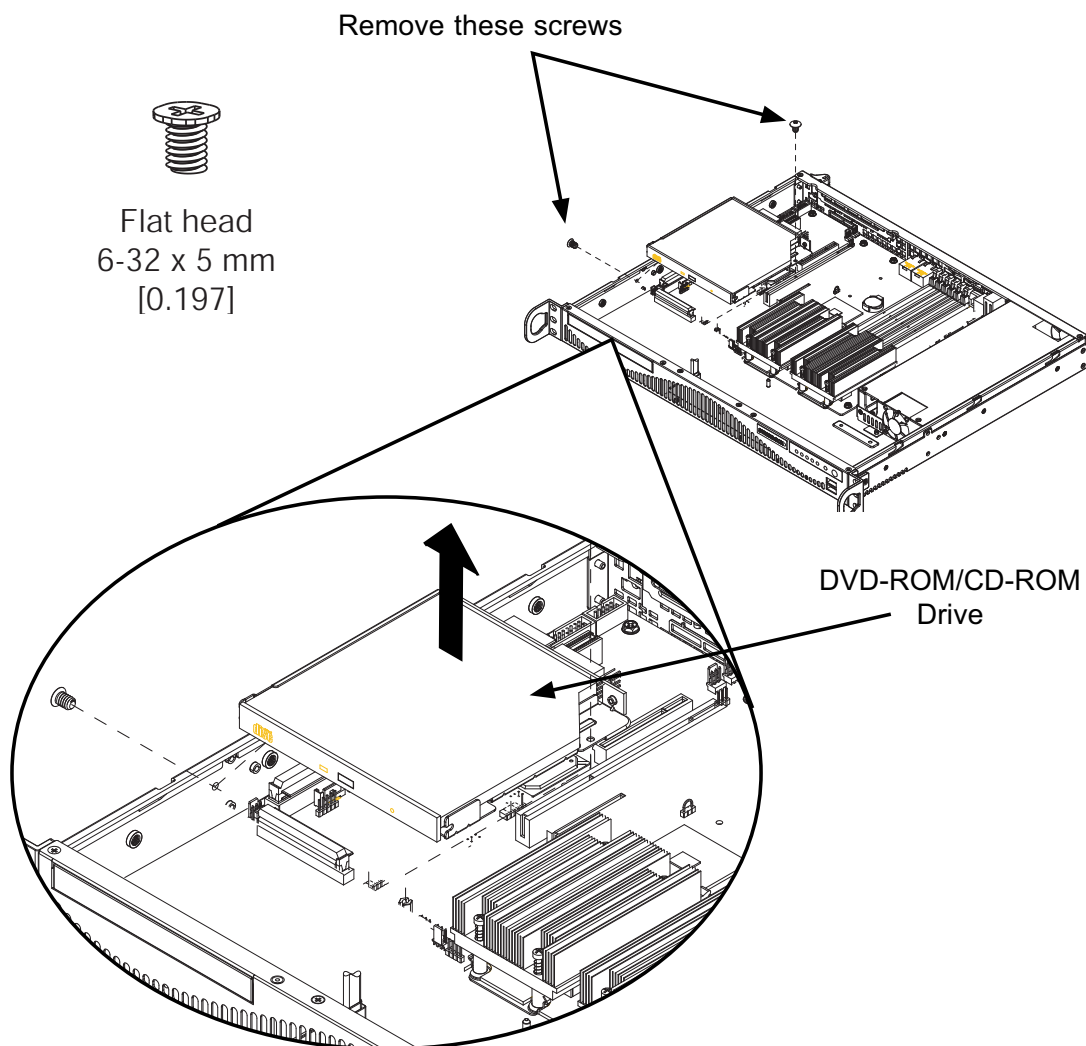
Remove the CD-ROM Drive to access the Hard Drive area
